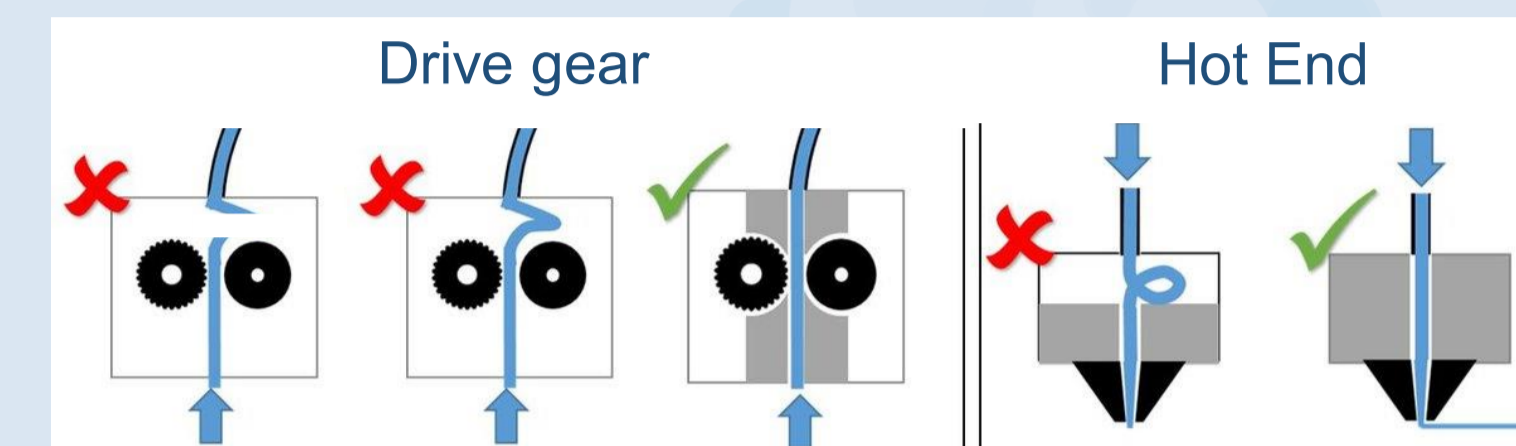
Failure mode of feed stock material in drive gear and hot end of an FDM printer.
